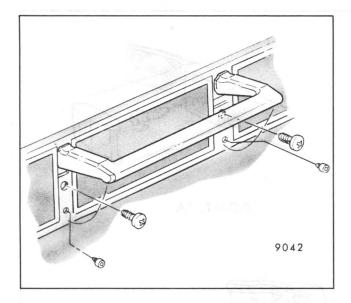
Typical Door Pull Handle Attachment - Buick and Cadillac "C and E" Styles
